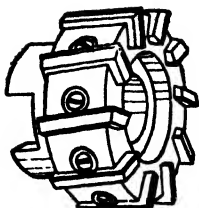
Face Milling Cutter with Inserted Teeth.
